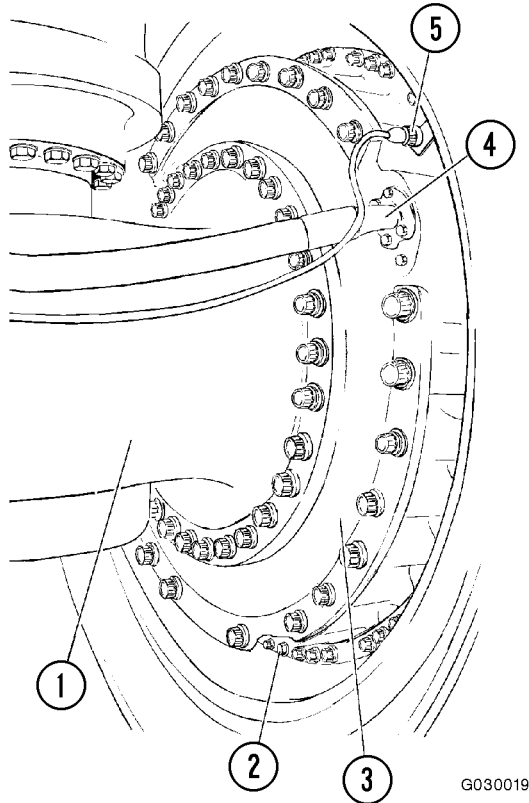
FRONT WHEEL & SPINDLE INSTALLATION
